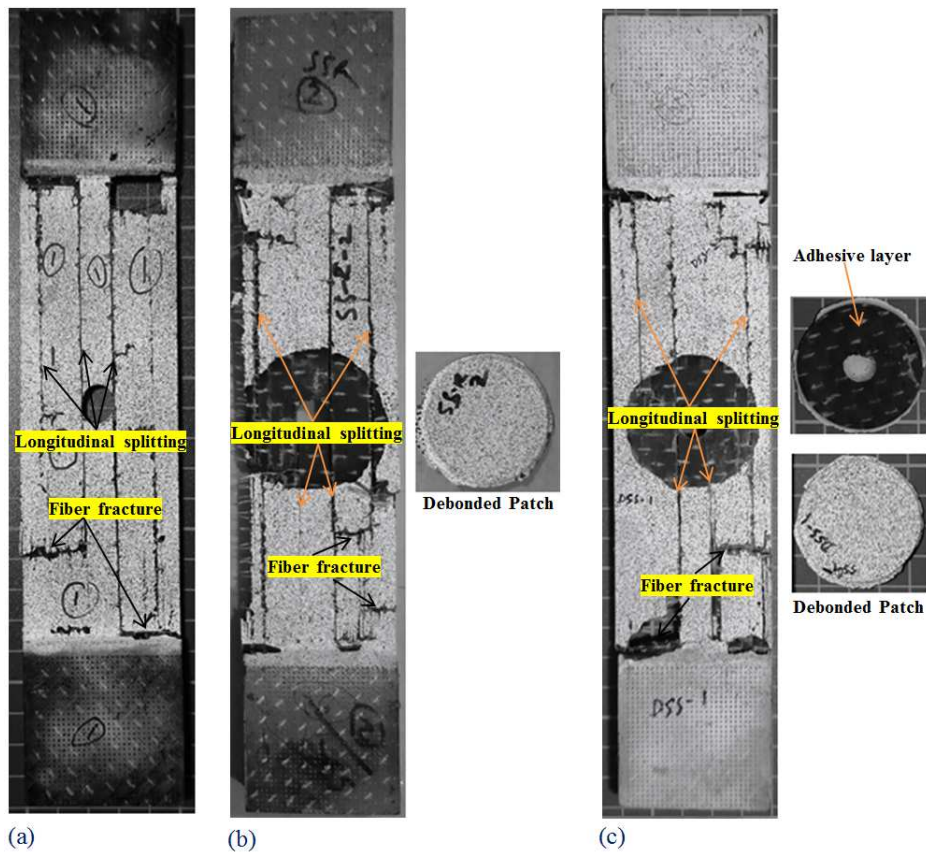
Failure mechanism (a) open cutout panel (b) single sided repaired panel (c) double sided repaired panel
